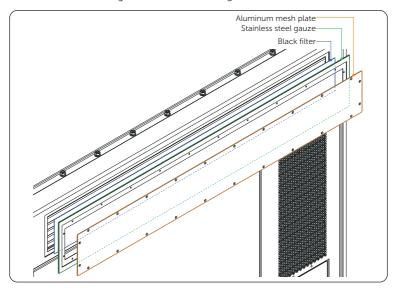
Dismantling aluminum mesh plate, stainless steel gauze, black filter
